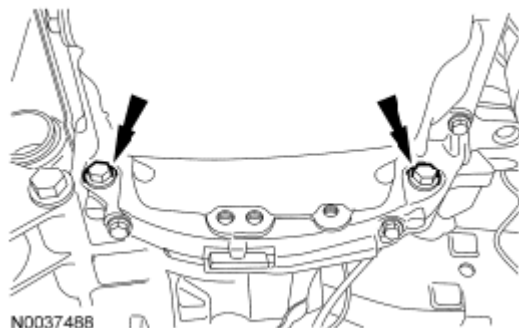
Locating Oil Pan-To-Bellhousing Bolts
